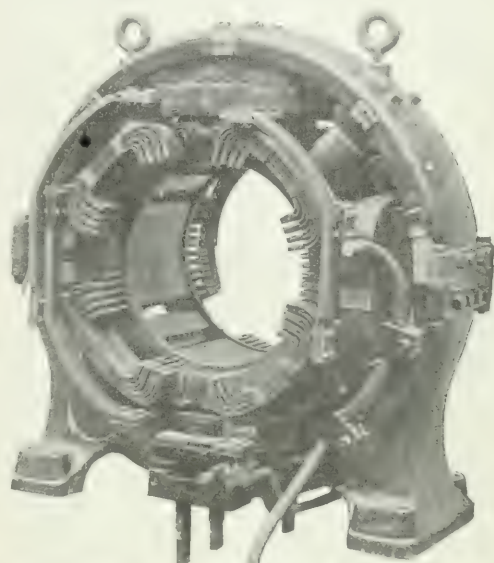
STATIONARY PART OF A 375-KW, 2500-R. P. M. MACHINE. FIVE-POLE GENERATOR.
